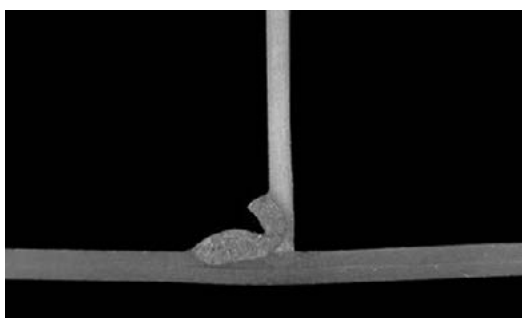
Macrostructure of the T-joint with a deep scratch in the weld face
